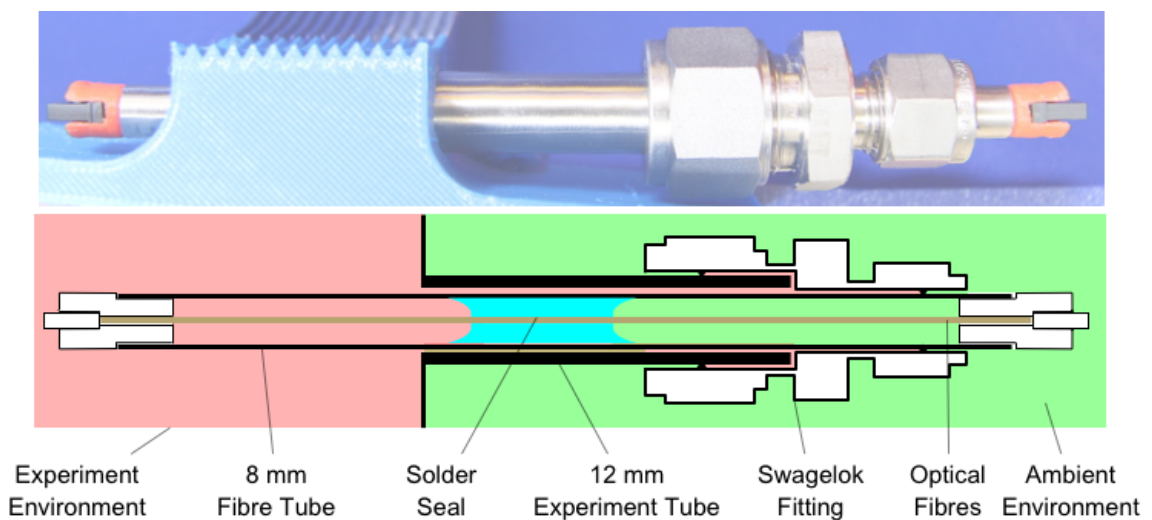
Photograph and diagram of feed-through assembly of a demonstration assembly. The feed-through is shown separating the (red) experimental environment and the (green) ambient environment. An 8 mm fibre tube is fitted with two ferrule supports and ferrules, connected by optical fibre. A solder seal is shown in the centre of the tube. A 12 mm tube is attached to the experiment vessel wall, and a Swagelok fitting connects the two tubes.
